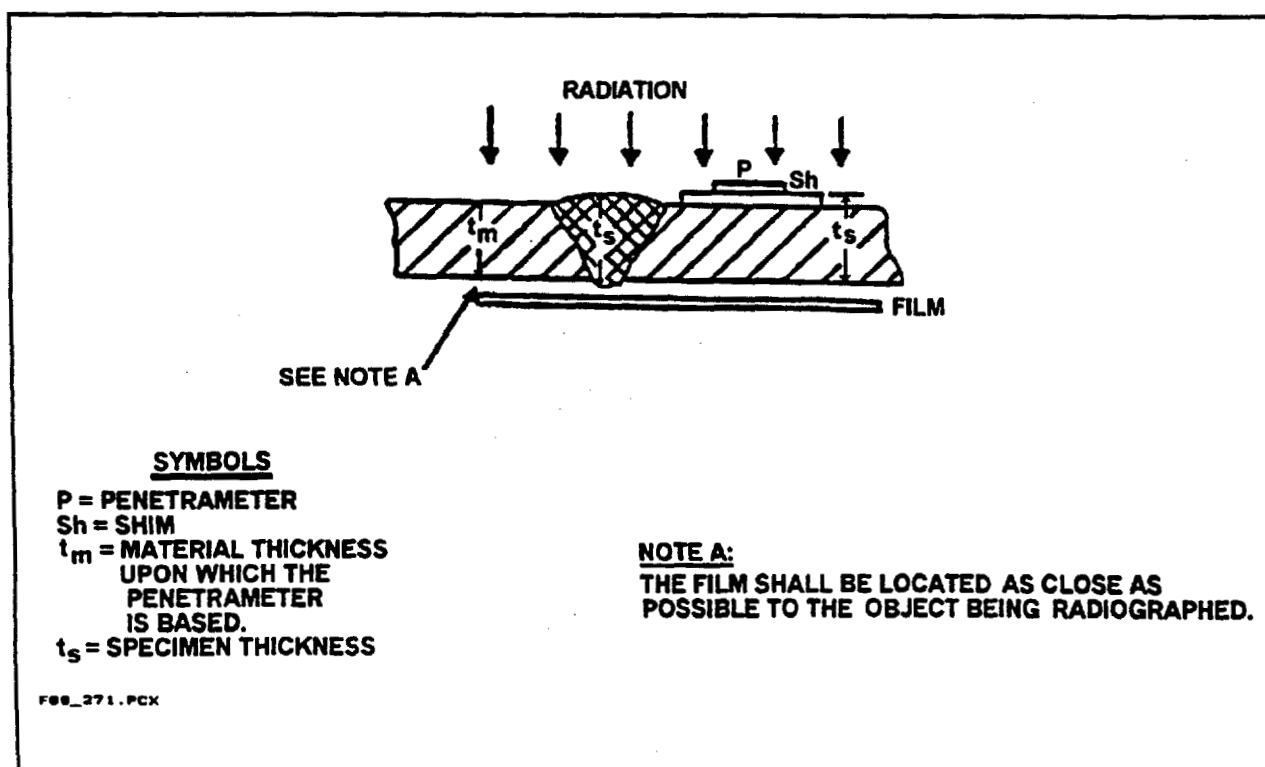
Examples of T_m , T_s , and penetrameter placement: single wall, weld reinforcement, no back-up strip.
